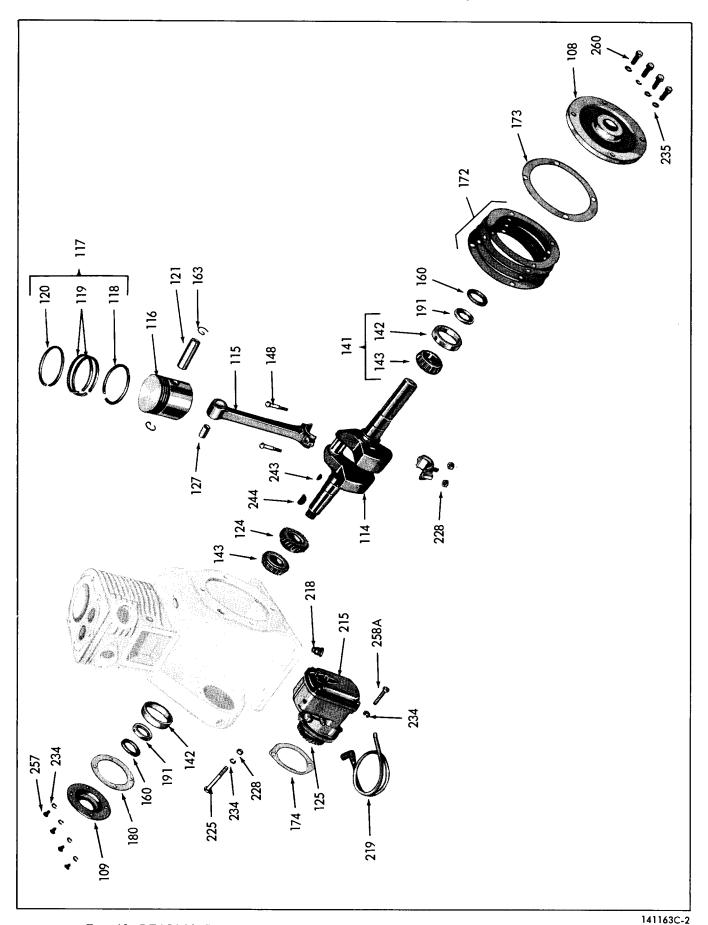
, BEARING PLATE, CRANKSHAFT, PISTON AND CONNECTING ROD GROUP
